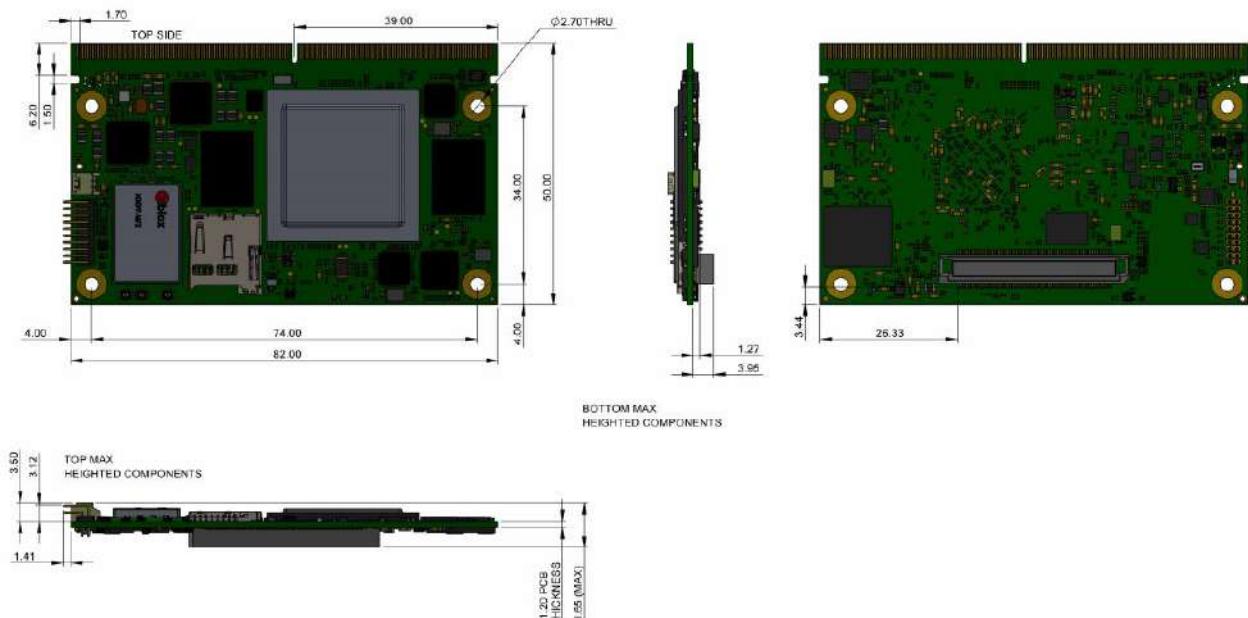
Mechanical dimensions of i.MX8 SMARC SOM
